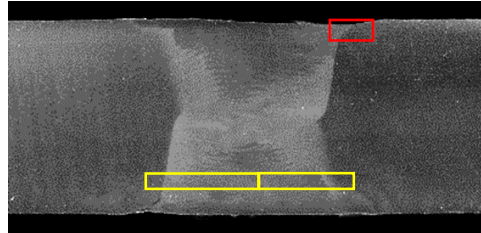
Friction stir processed weldment of Figure 29b.
